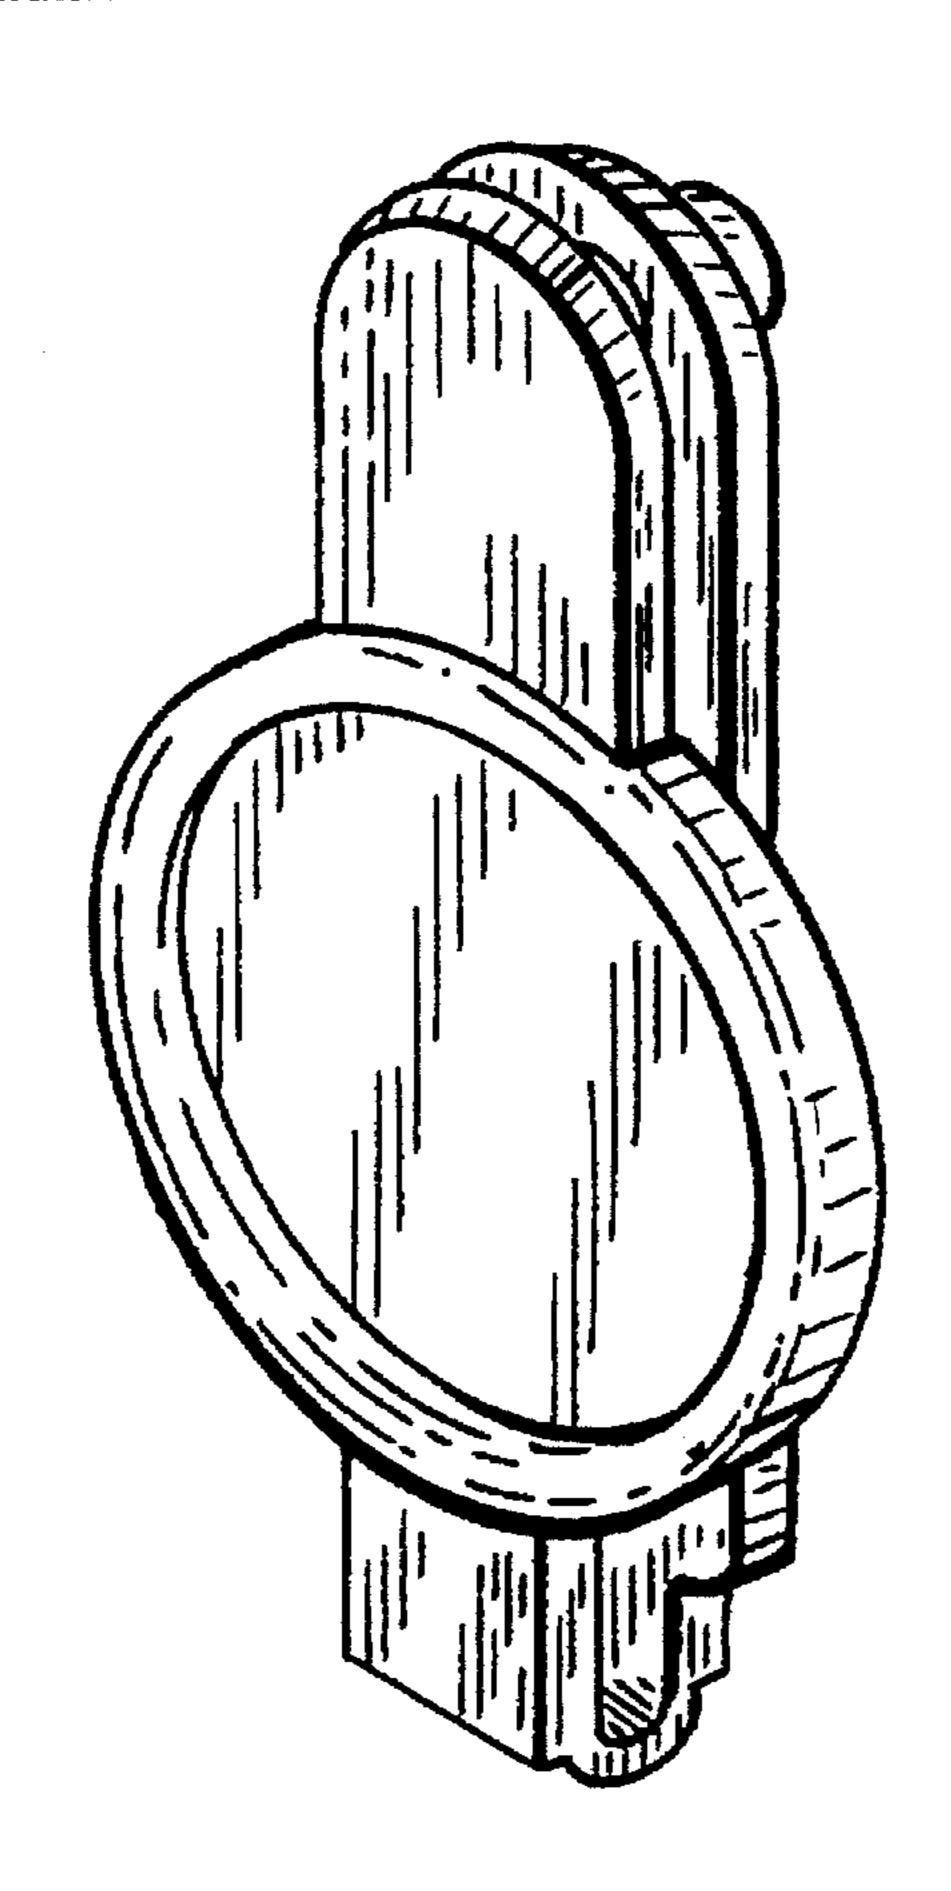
is a front view of the closed reusable extension for zipper pulls of this invention;
